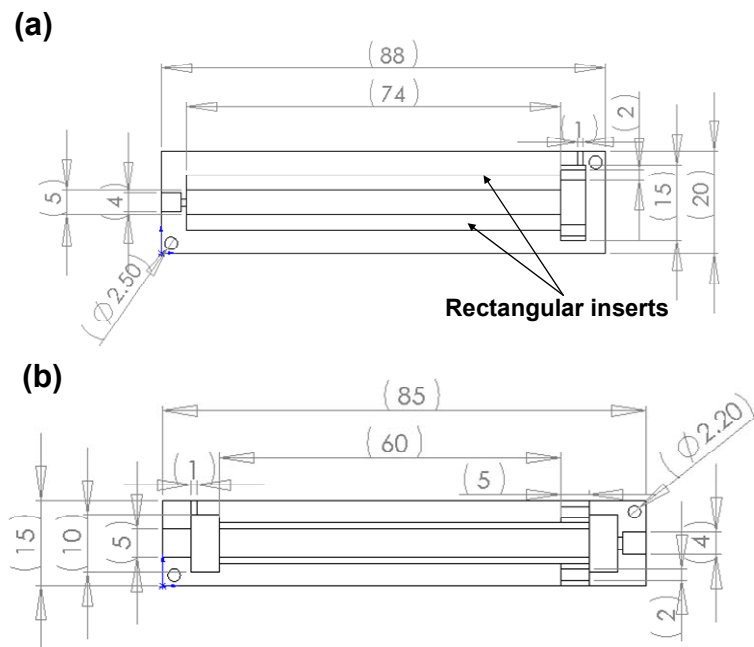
(a) Half Mandrel mold and (b) Machine mold dimensions in mm.
